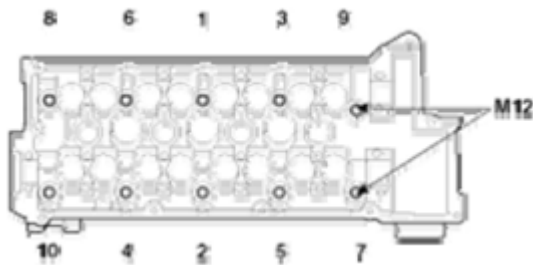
Identifying Tightening Sequence Of Cylinder Head Bolts
